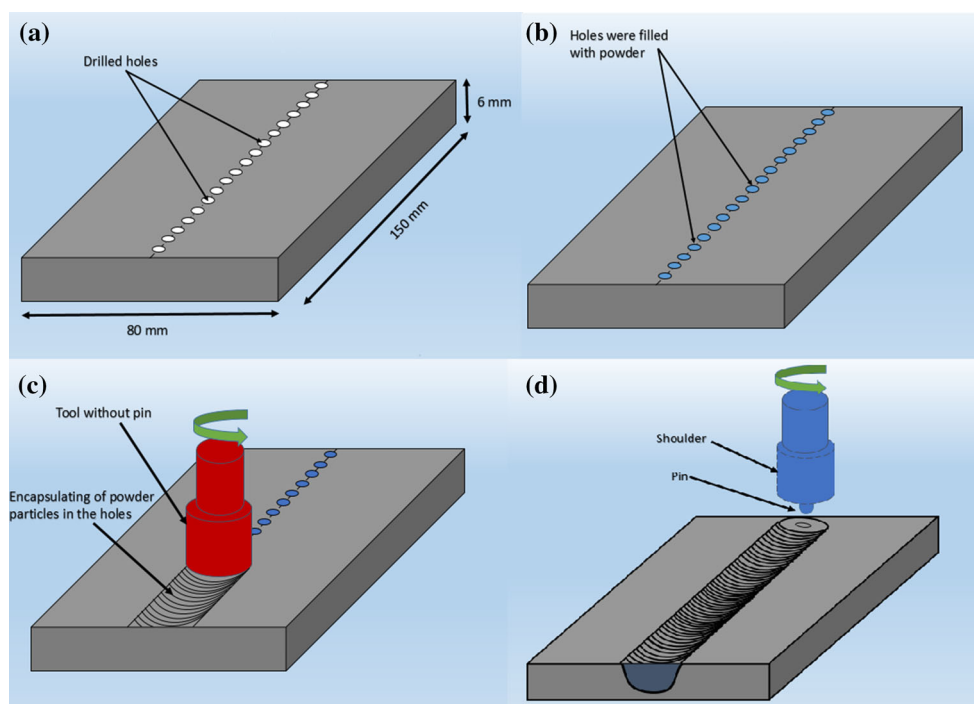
Schematic of fabrication of surface composite a drilled holes, b holes filled with TiO₂ particles, c encapsulating of particles into holes with pin-less tool, d first FSP pass with pin-tool
